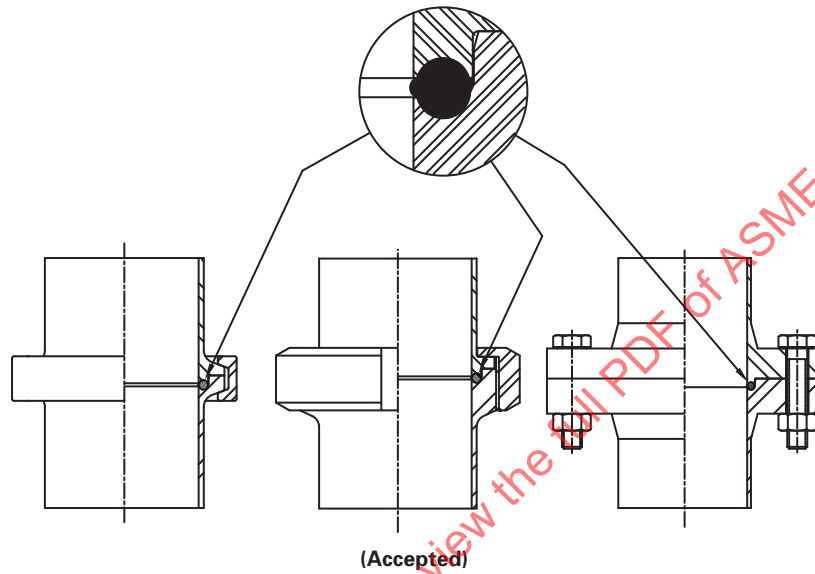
Hygienic Clamp Union per DIN 11864
